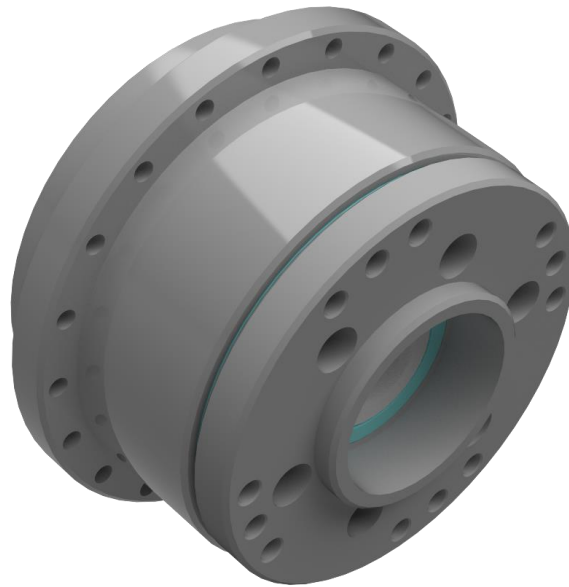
Isometric View – Hollow Shaft cycloidal drive
